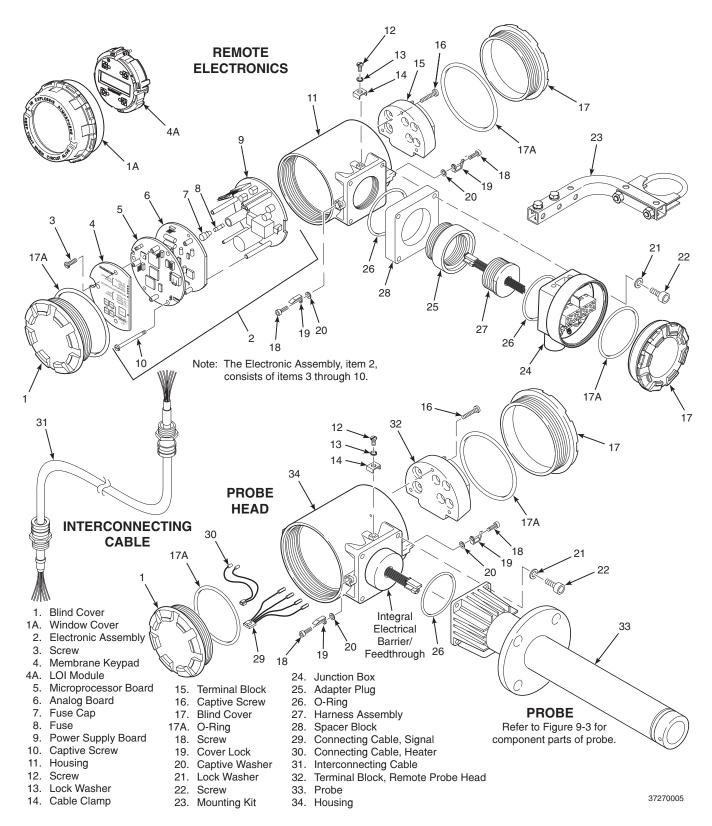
Hazardous Area Oxymitter 4000 with Remote Electronics - Exploded View
